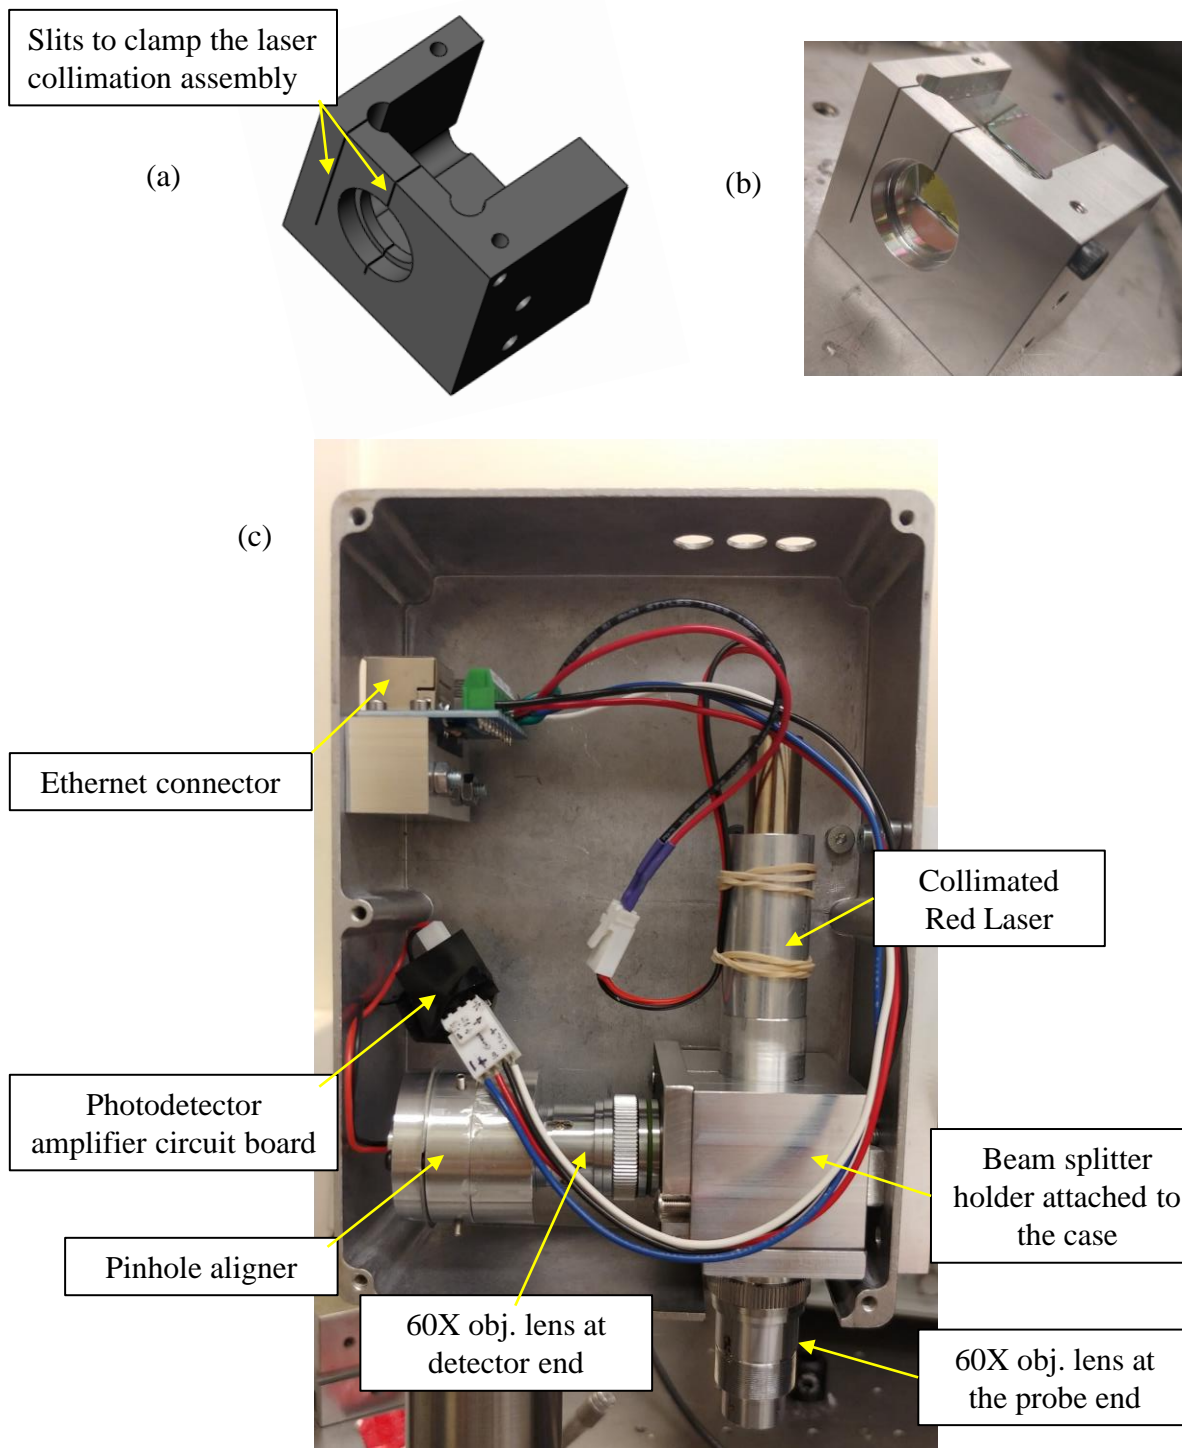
Fabricated fourth prototype; (a) solid model (b) fabricated beam splitter holder with a slit made using a wire EDM to clamp the collimating assembly of the (c) fabricated prototype.
